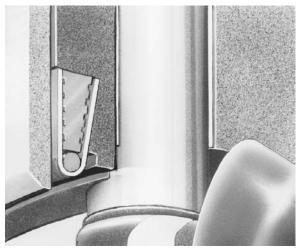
Butterfly soft seat assisted by mechanical preloading. (*Courtesy of The Duriron Company, Valve Division*)
